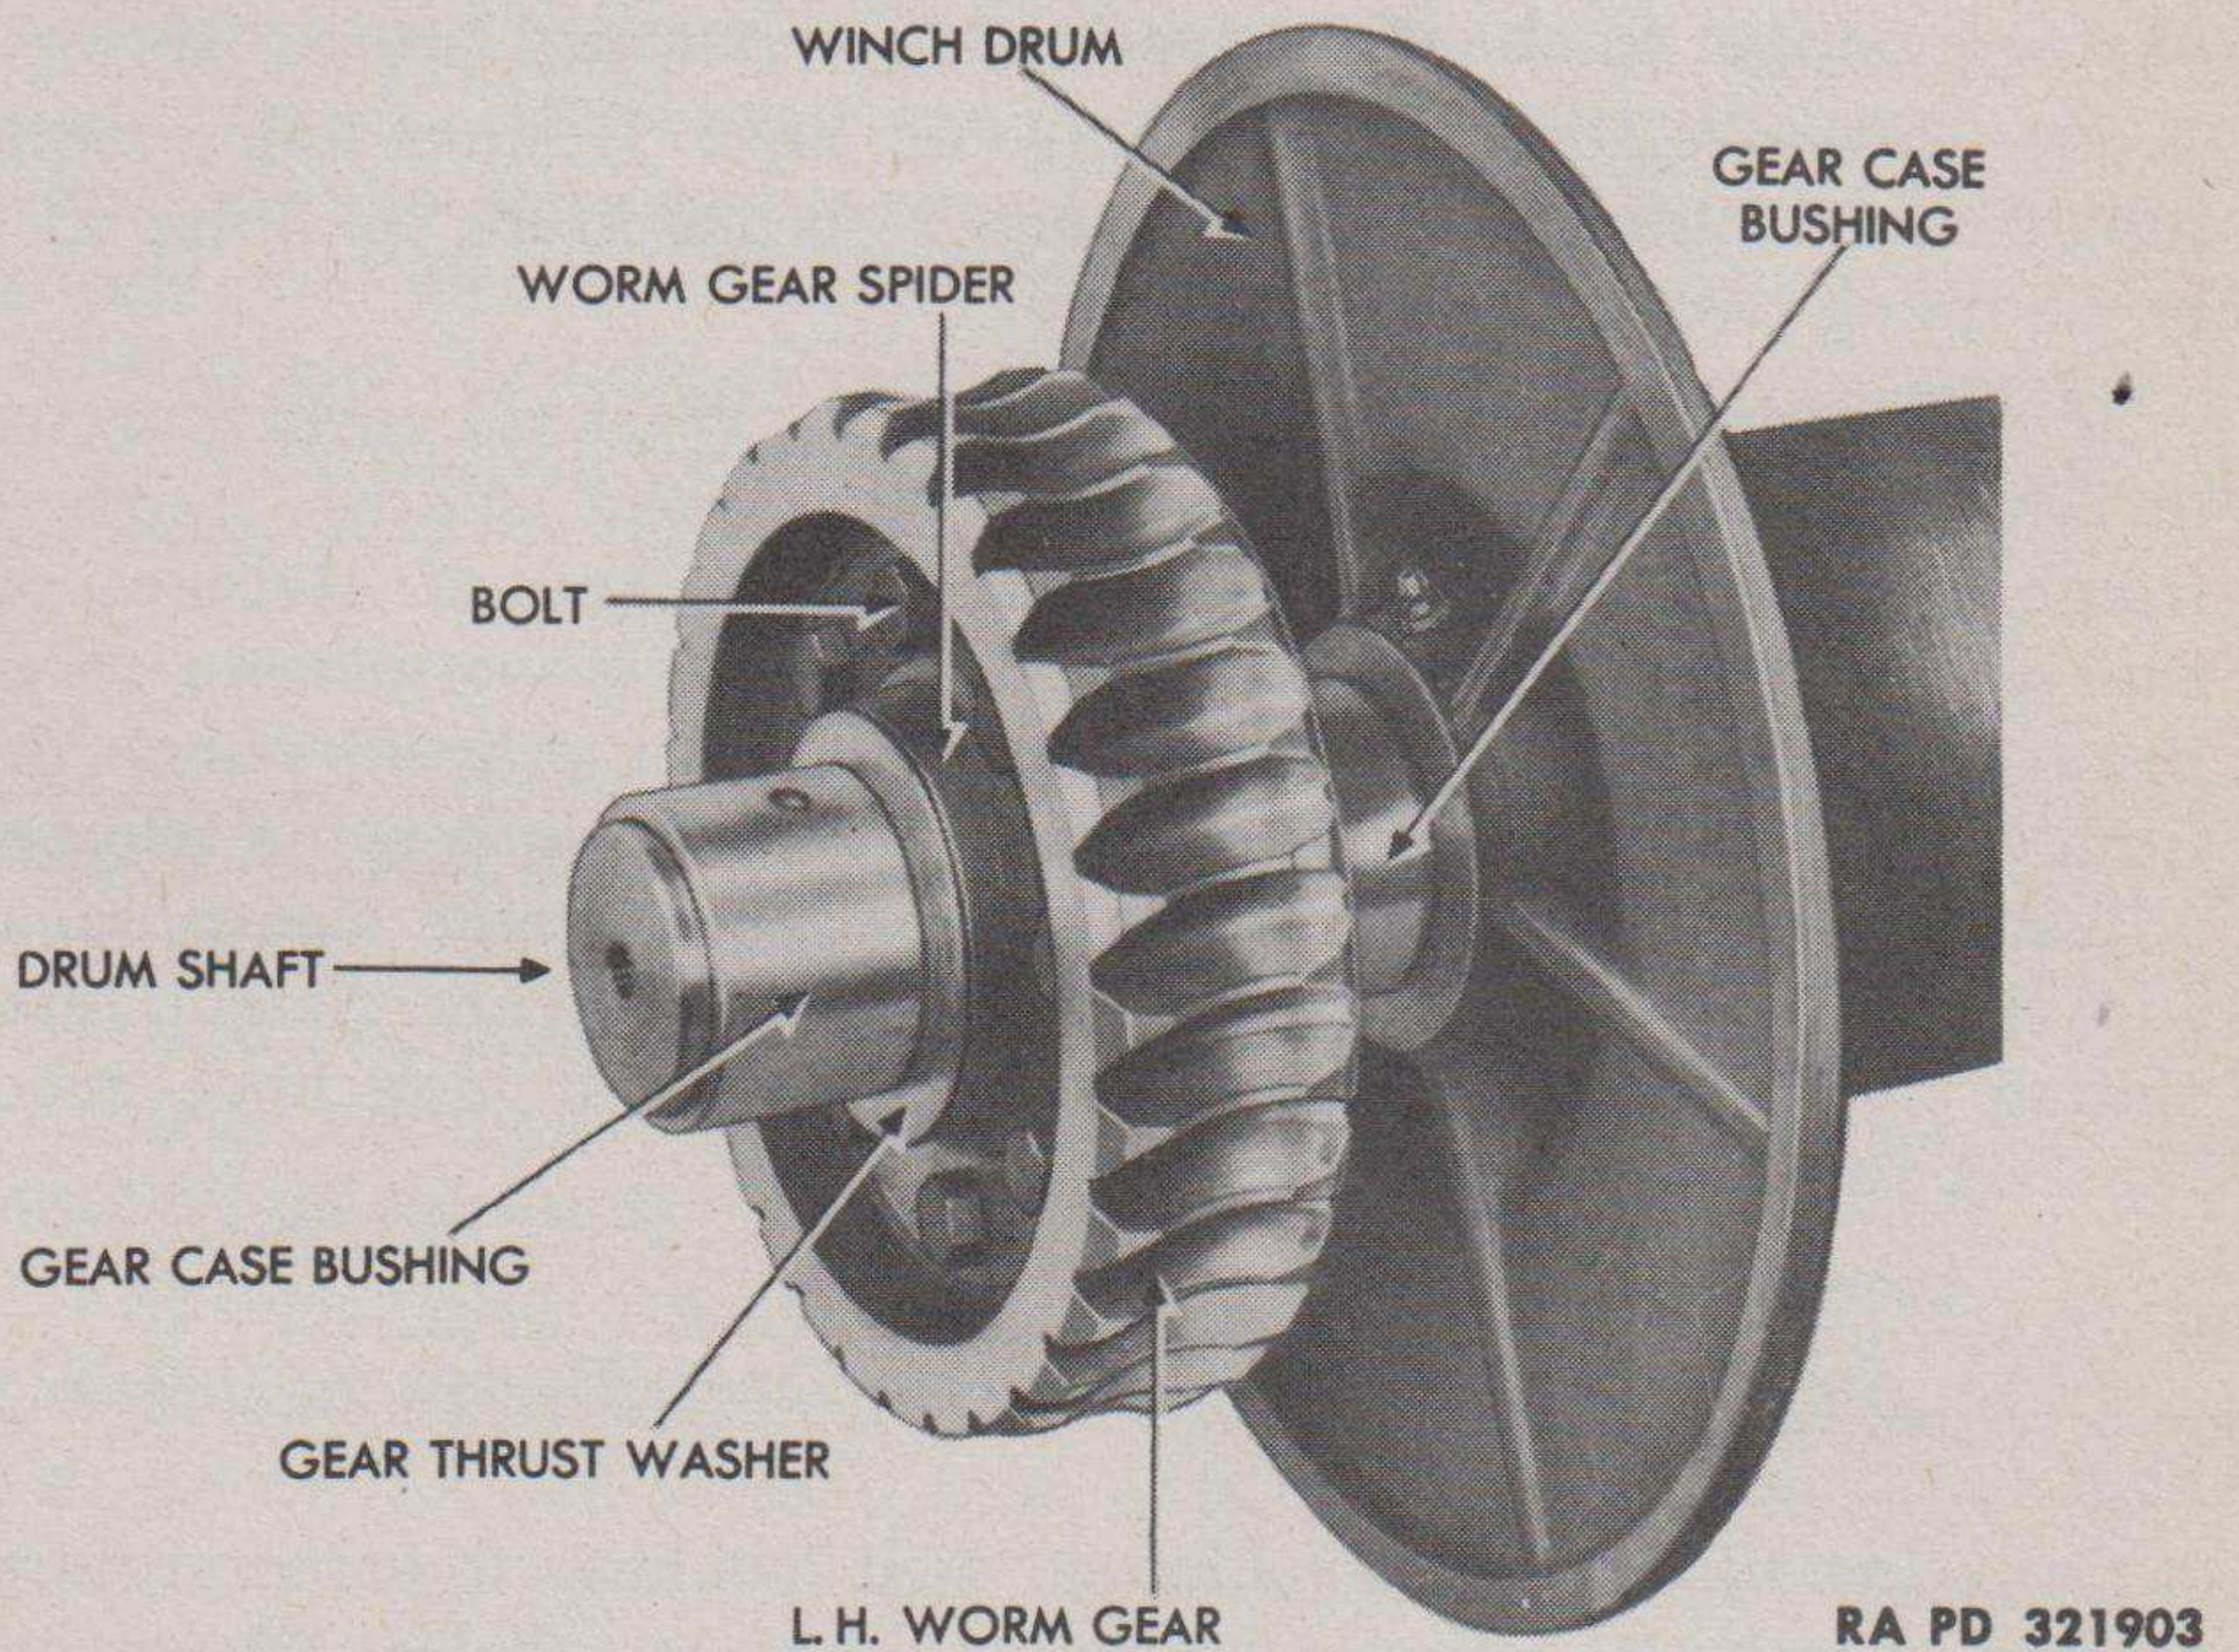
Left-hand Worm and Drum Assembly — Gear Case Removed
